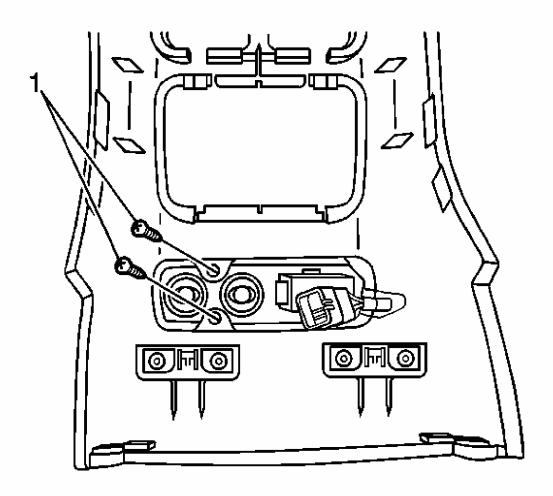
View Of Accessory Outlet Plate Screws Courtesy of GENERAL MOTORS CORP.
